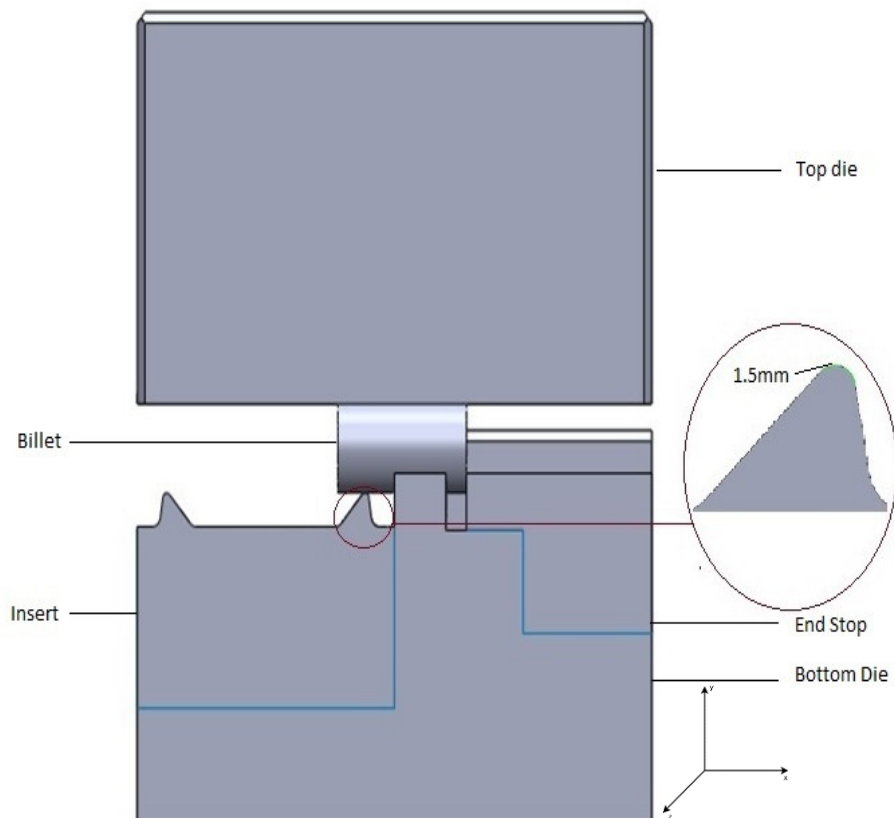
Four Piece die set consisting of Top die, Bottom die, Insert (with fillet radius of 1.5 mm) and End stop
